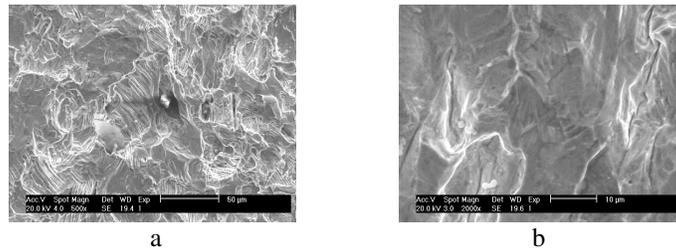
Pitting and cracks for the high quality-polishing specimen
